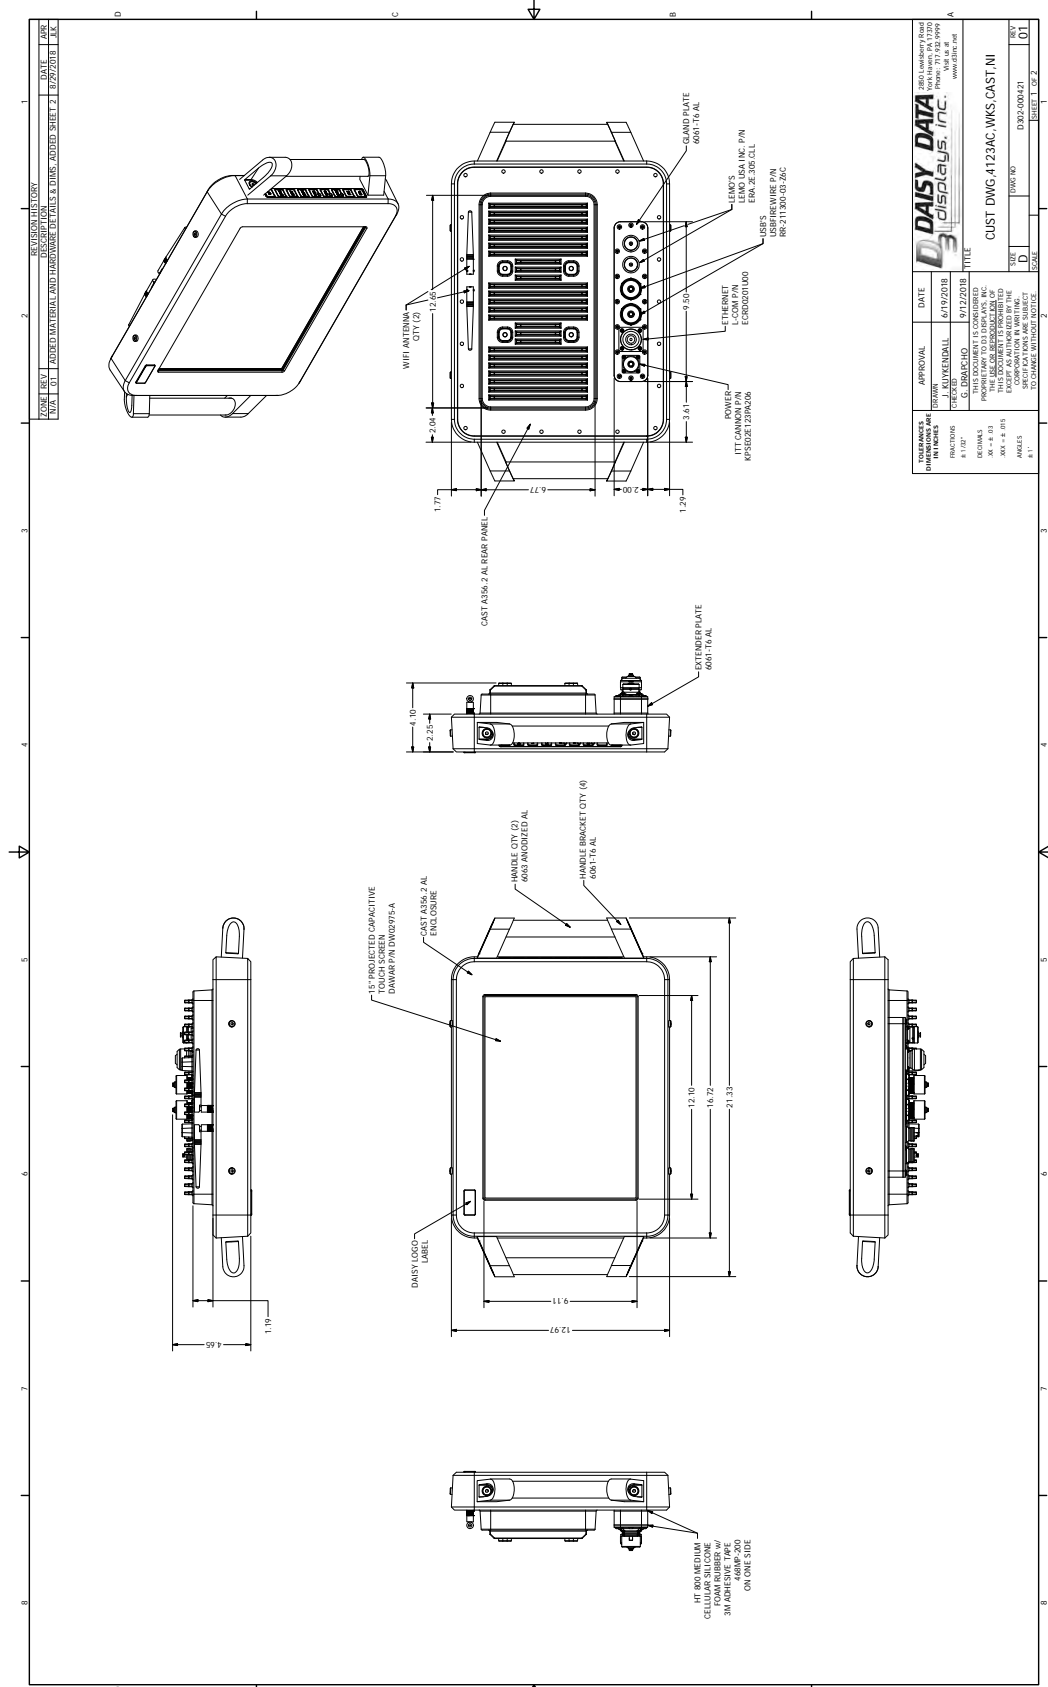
Model 4123AC Mechanical Drawing (1 of 2)
